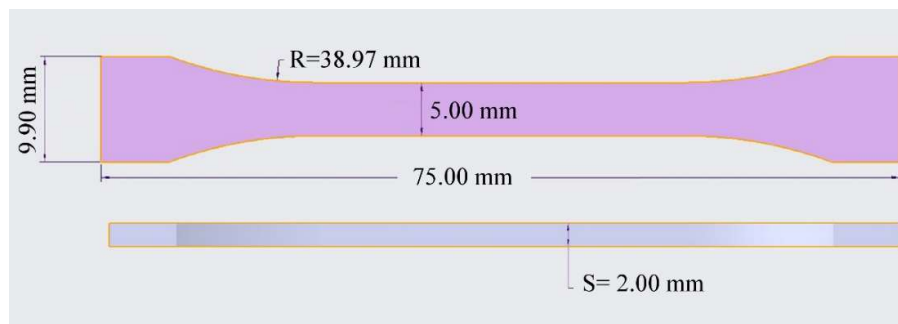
Geometry of the PP specimen manufactured by injection molding.
